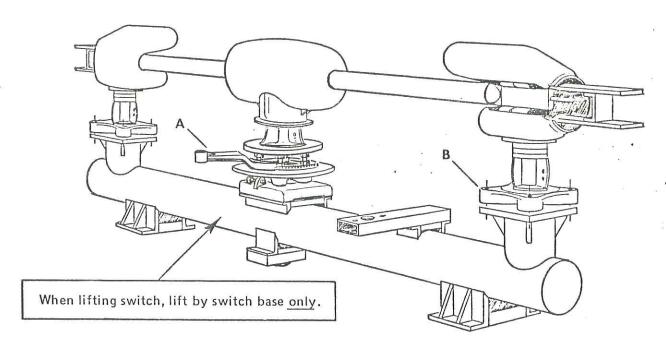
Type RDA 500 kV as shipped. Corona shields and rings, operating mechanism components, motor operators, manual gearboxes, insulators, and bolts are shipped boxed separately. The operating arm is labeled "A". The insulator mounting adaptors are "B".
